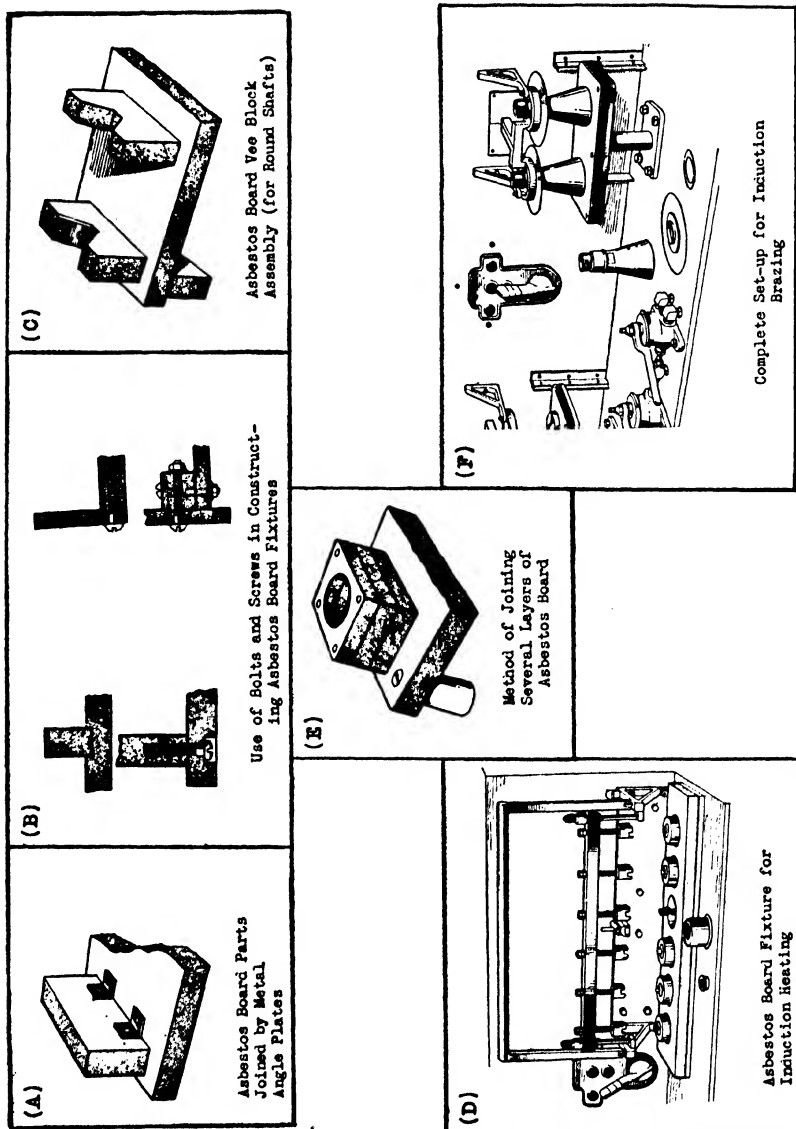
Built-up Asbestos Board Fixtures. (A) Asbestos board parts joined by metal angle plates. (B) Use of bolts and screws in constructing asbestos board fixtures. (C) Asbestos board vee block assembly (for round shafts). (D) Asbestos board fixtures for induction heating. (E) Method of joining several layers of asbestos board. (F) Complete setup for induction brazing.
